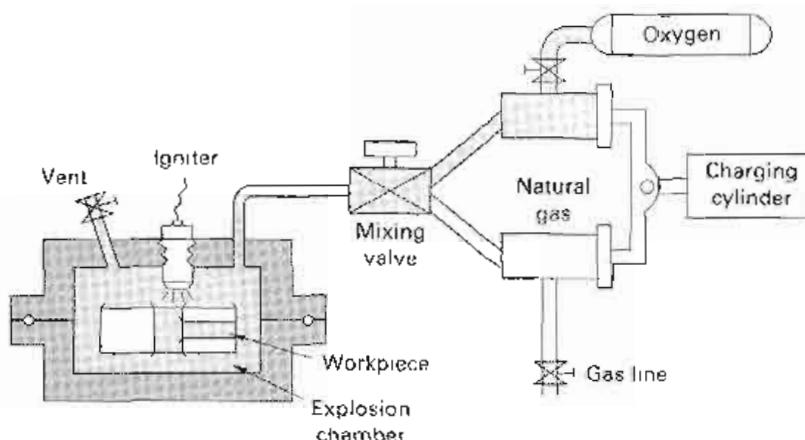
Thermochemical machining process for the removal of burrs and fins.
